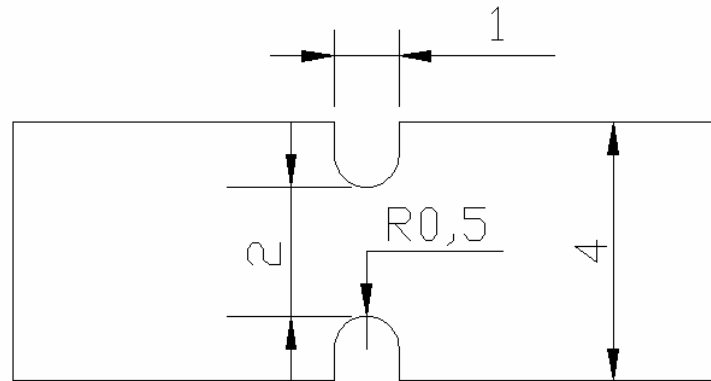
Mechanical drawing of fatigue test sample (unit mm)
